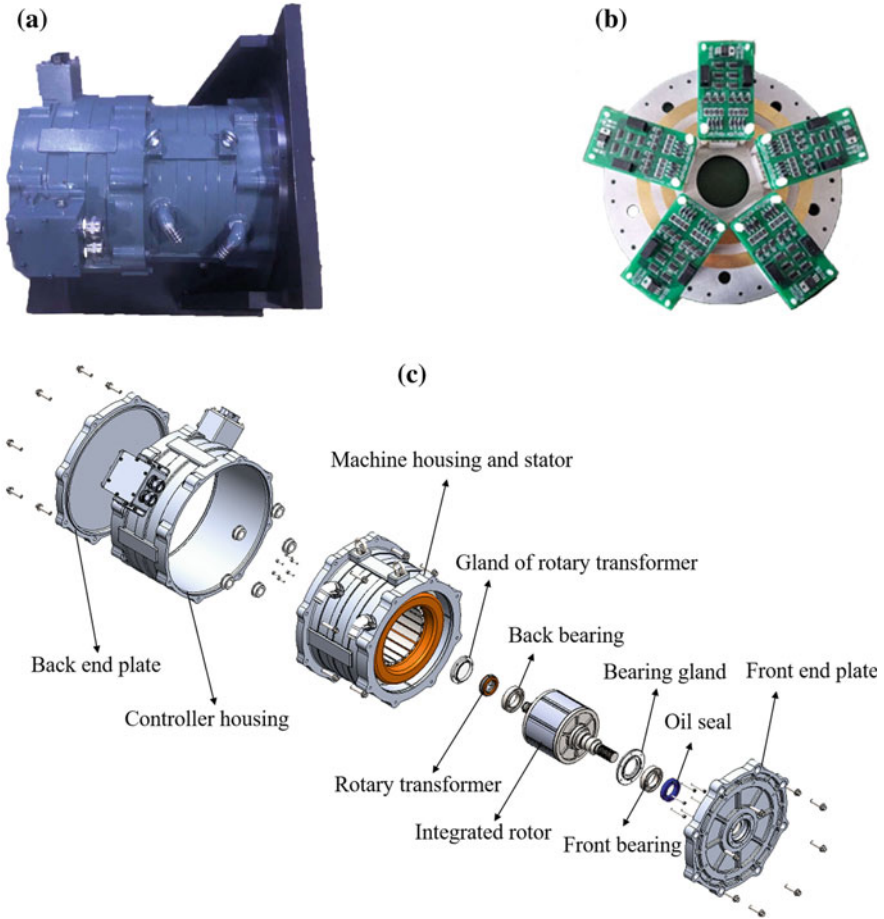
IMD prototype pictures. a Five-phase high speed permanent magnet synchronous integrated motor driver prototype. b Controller in IMD. c Explosive view of IMD
